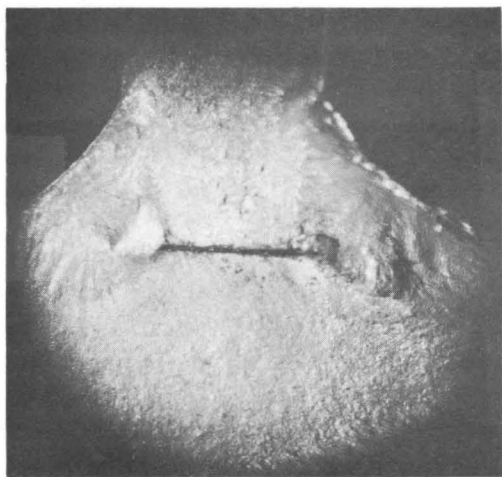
Macrophotographs of Web-to-Flange Fillet Welds
